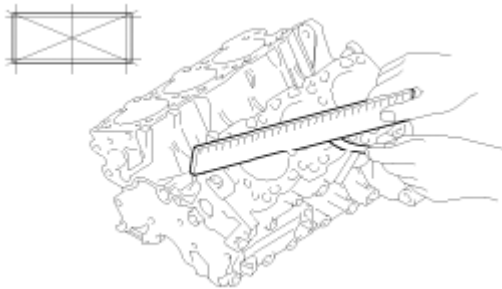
Inspecting Flatness Of Cylinder Block Gasket Surface
